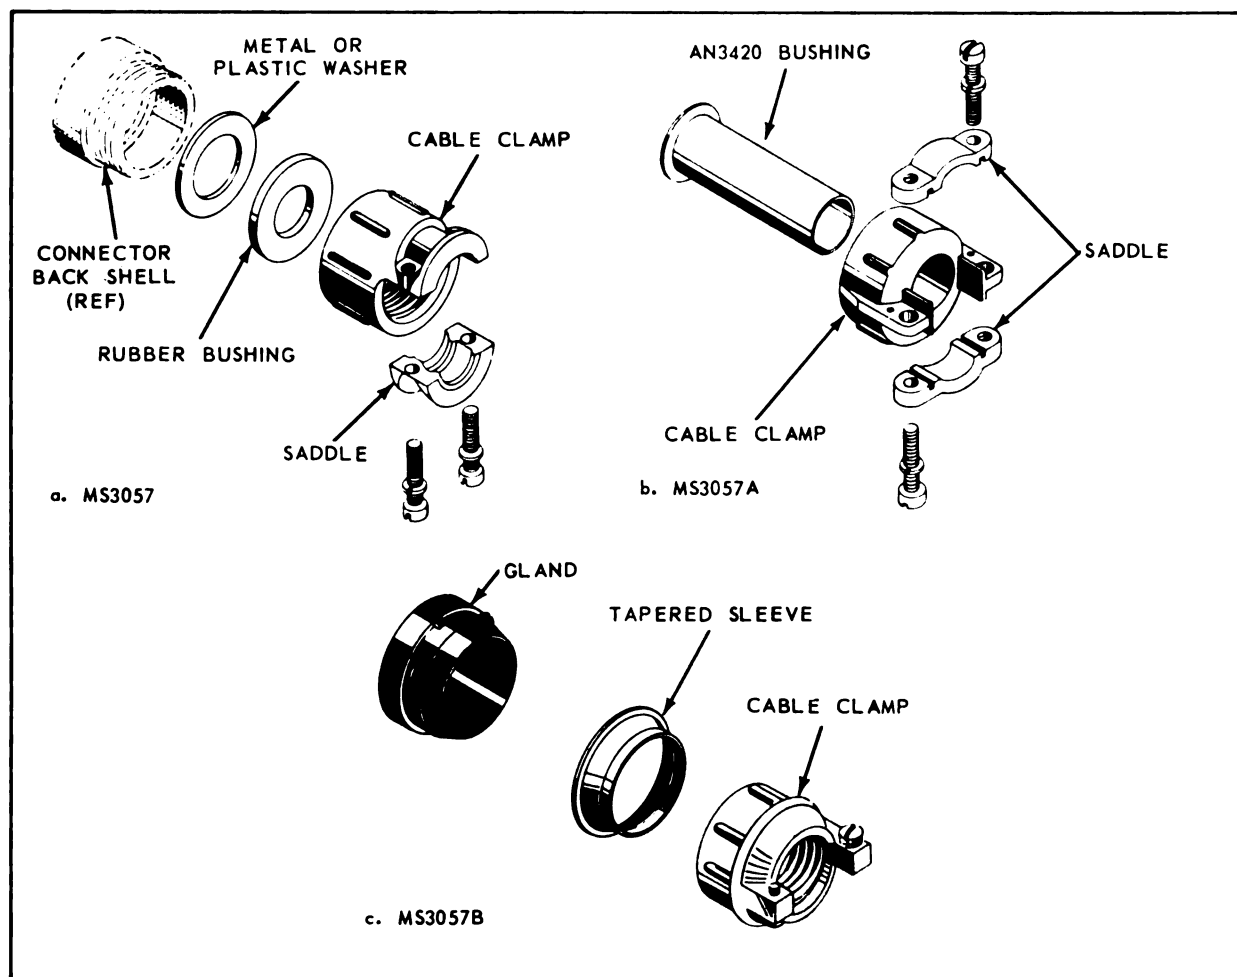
MS3057 Connector Cable Clamp Types - Exploded View
